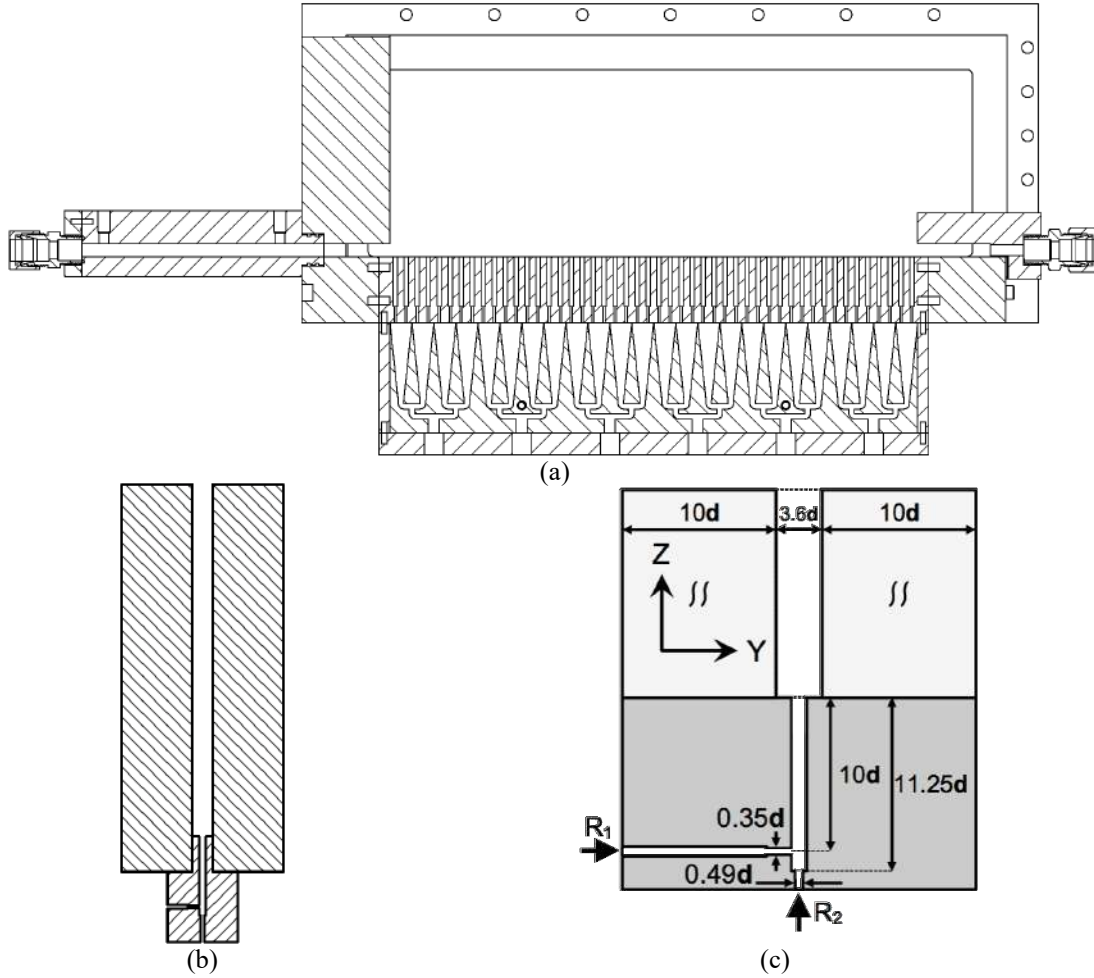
(a) Center cross section view of eLMDE, (b) side cross section view of eLMDE, and (c) schematic drawing of one injector
